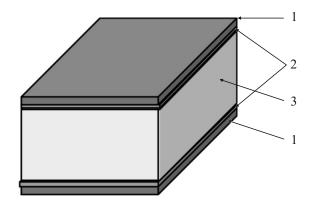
Sandwich laminate: 1 — face sheets, 2 — adhesive layer, and 3 — core.
